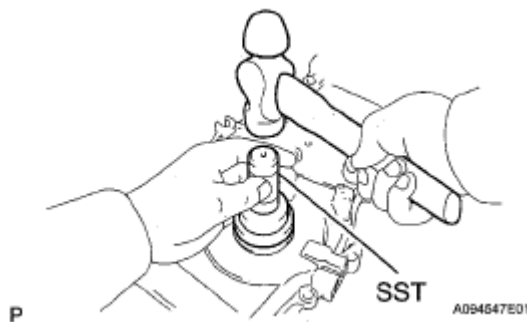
Tapping In New Oil Seal Using SST And Hammer
